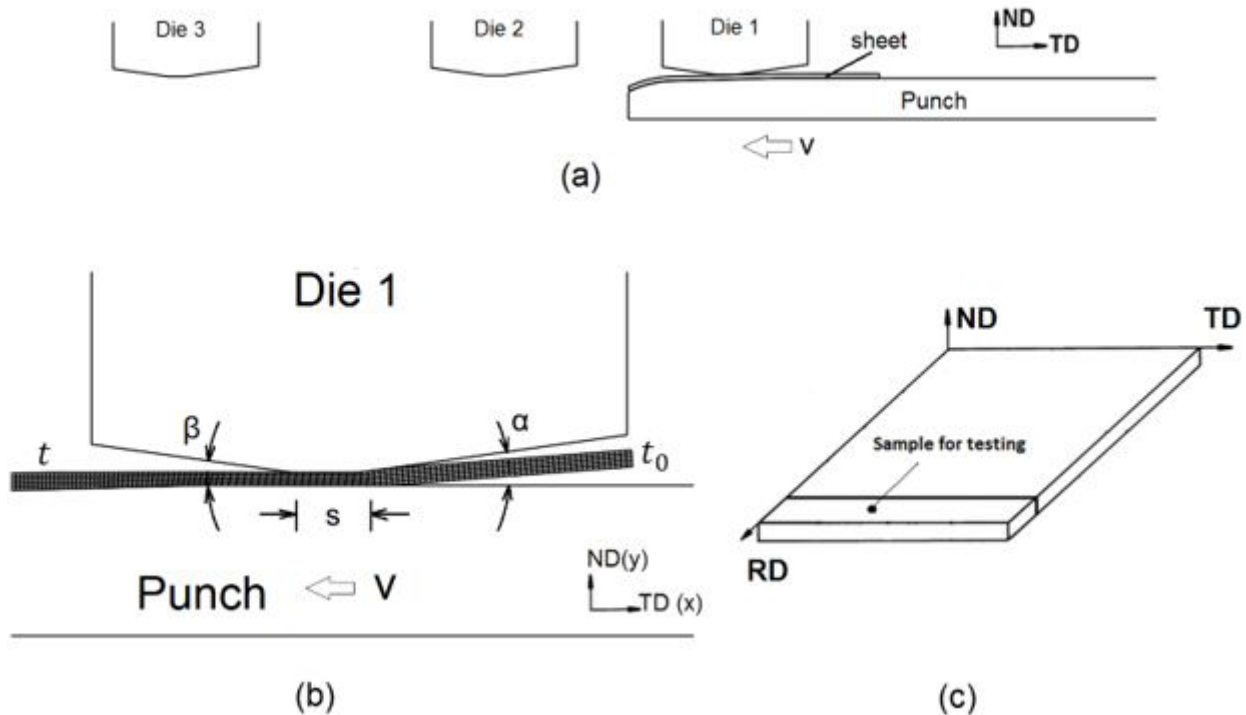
Schematics of strip ironing and its key dimensions, (a) longitudinal section of the sheet in strip ironing with three ironing dies; (b) key dimensions of ironing: α is die entry angle, β is die exit angle, s is landing length, t_0 is thickness before ironing, t is thickness after ironing and v is ironing velocity; (c) longitudinal section of the sheet
